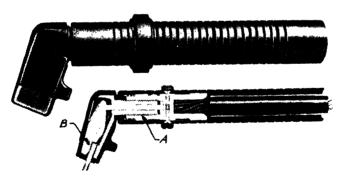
An electrode holder which permits using up more electrode, provides a powerful screw (A) and lever (B) action clamp, and improves visibility for hard to reach welds
